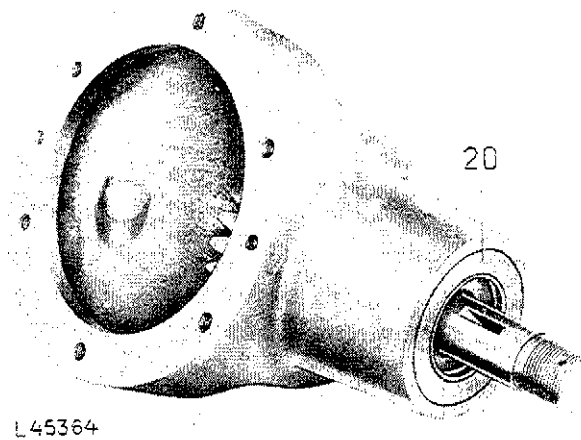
Removing Oil Seal from Belt Pulley Case
